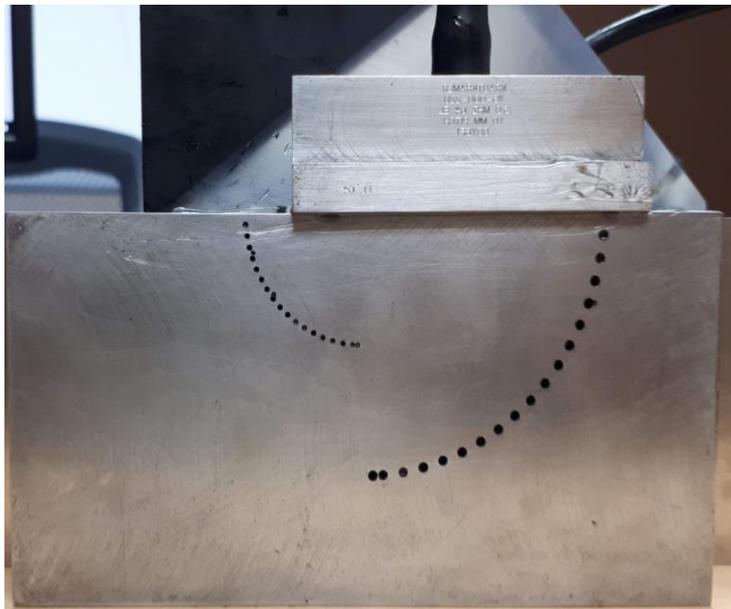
ASTM E2491 PA Assessment Test Block (Type B) with a challenging distribution of side drill holes.
